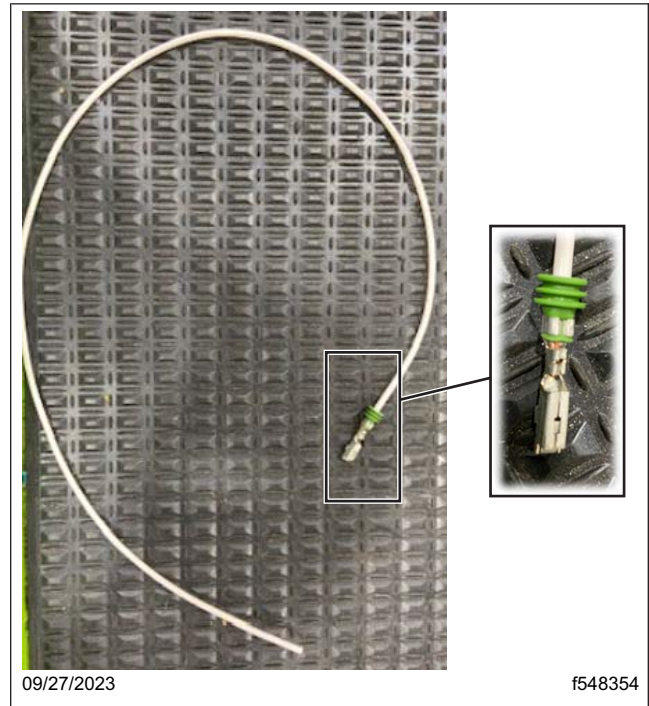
, 24-inch Length of 16 Gauge Wire with the Terminal and Seal Crimped on One End
